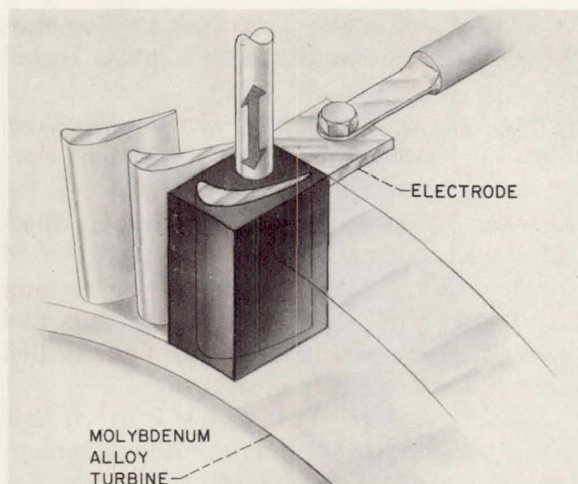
Phantom view of molybdenum turbine. Electric-discharge machining
